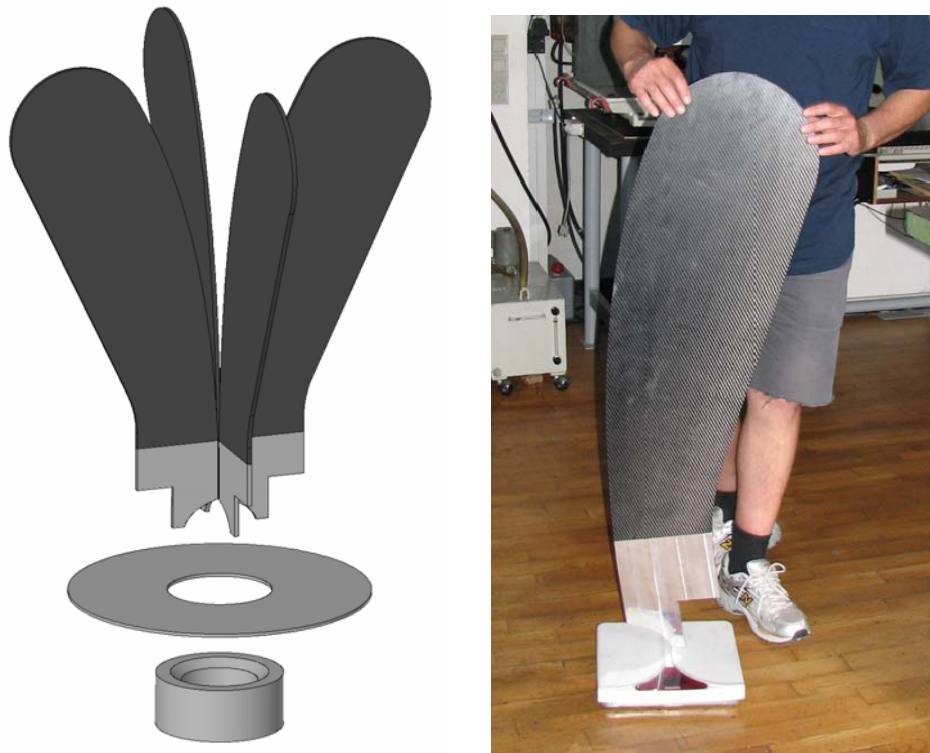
Parts of the designed 0.4-1.2 GHz probe with dark color marking parts made of CFRP (left) and single assembled ridge being weighted (right).
